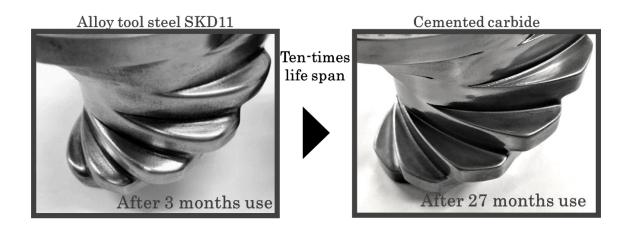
Photographs of the appearance alloy tool steel SKD11 and cemented carbide after use as the screw element to produce a glass-fiber high- filling compound
